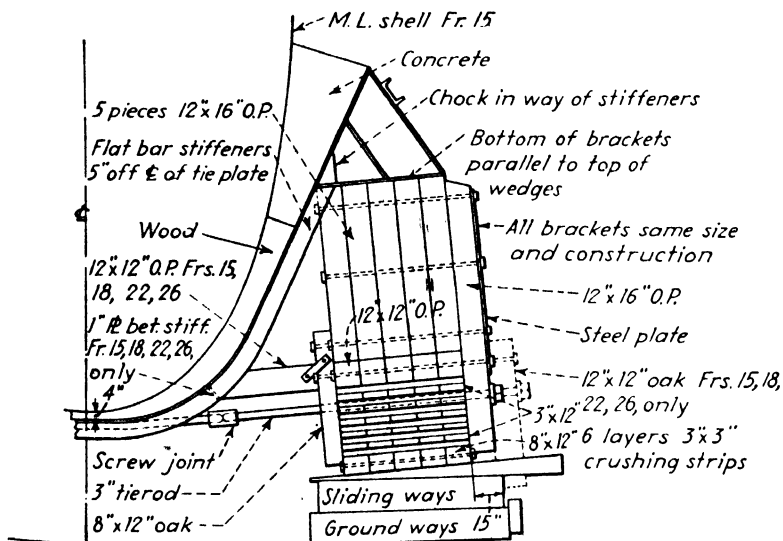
Transverse section of fore poppet shown in Fig. 560.
